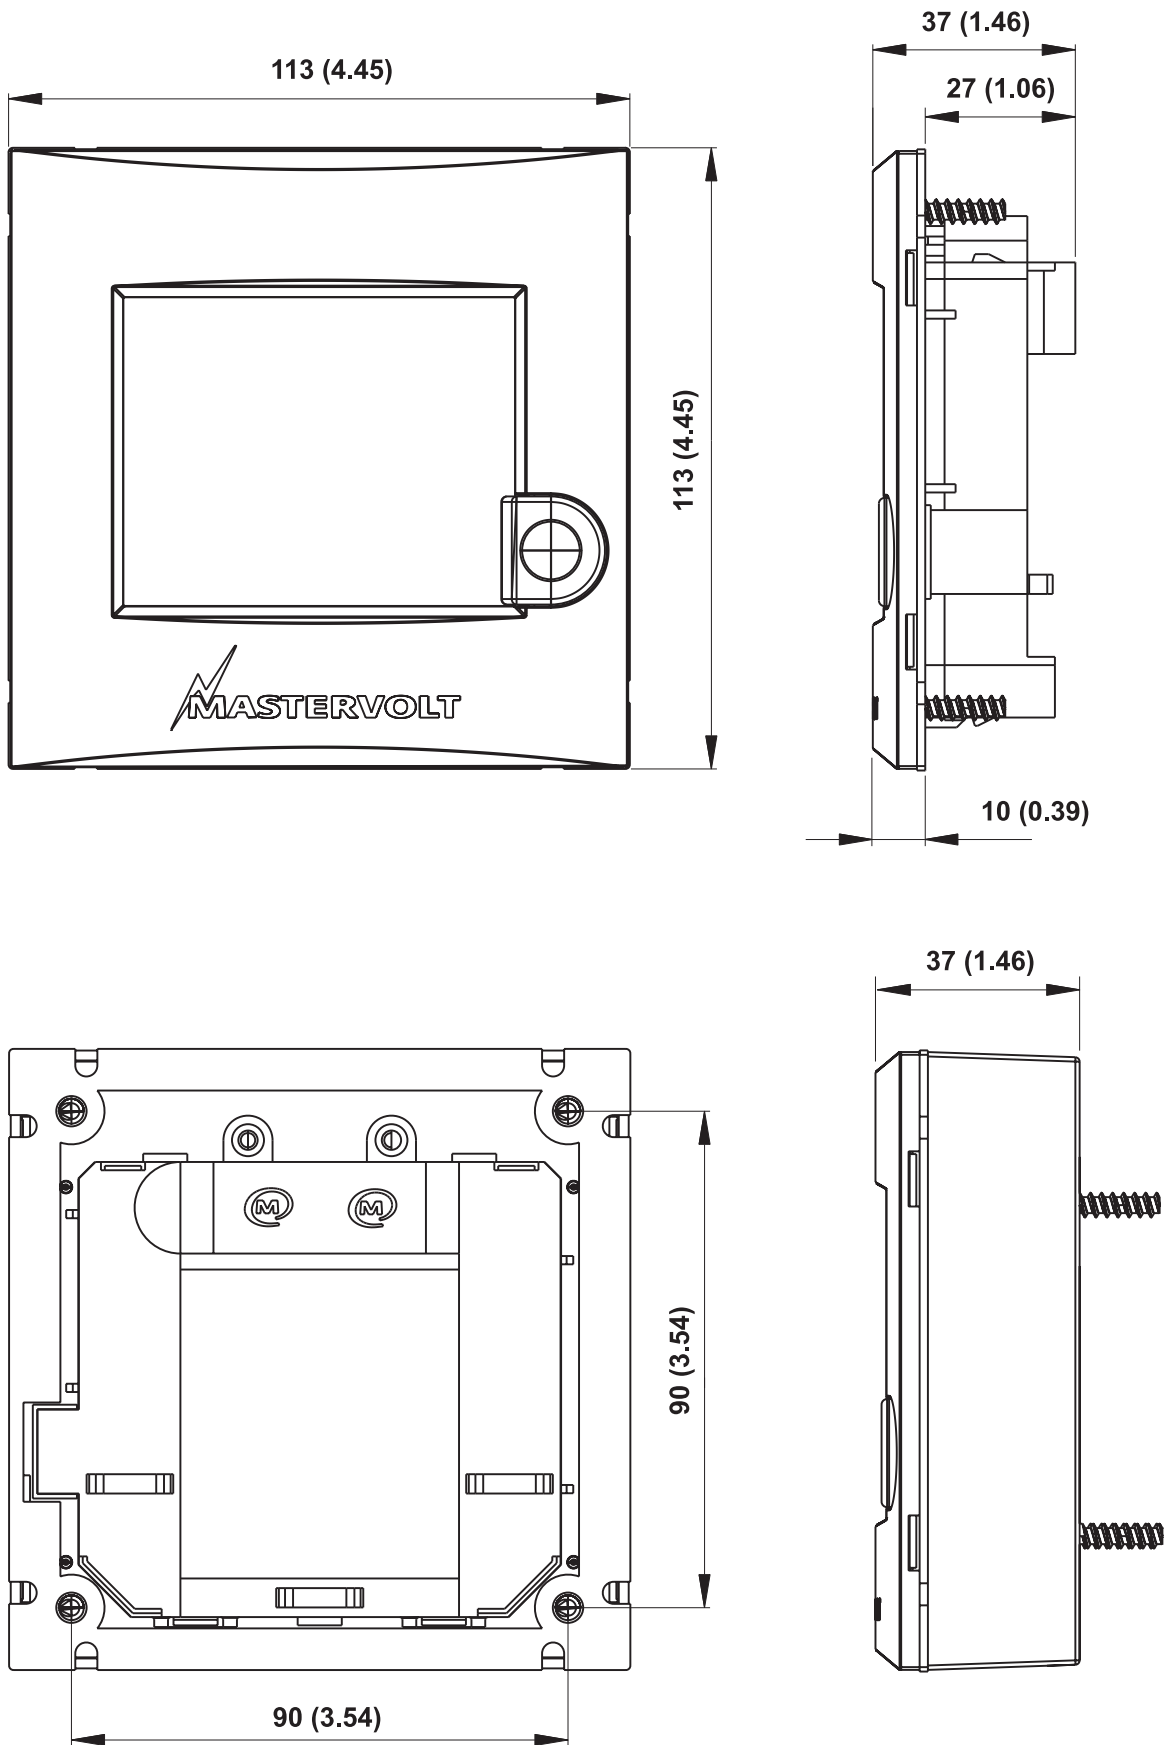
Dimensions in mm (inch) of the panel without and with outer casing.
